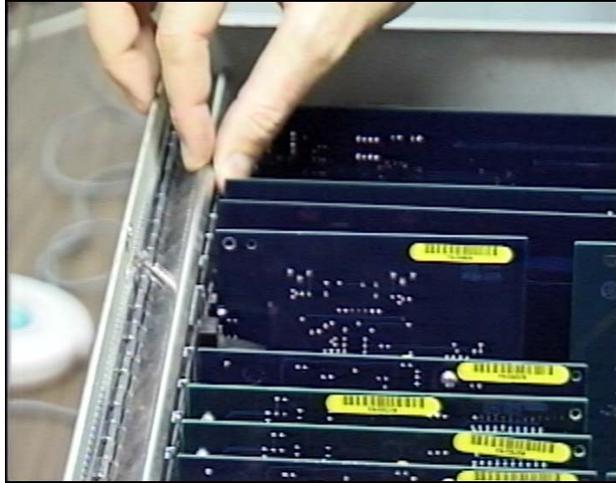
Removing the Bottom Cover of GlobeCaster
